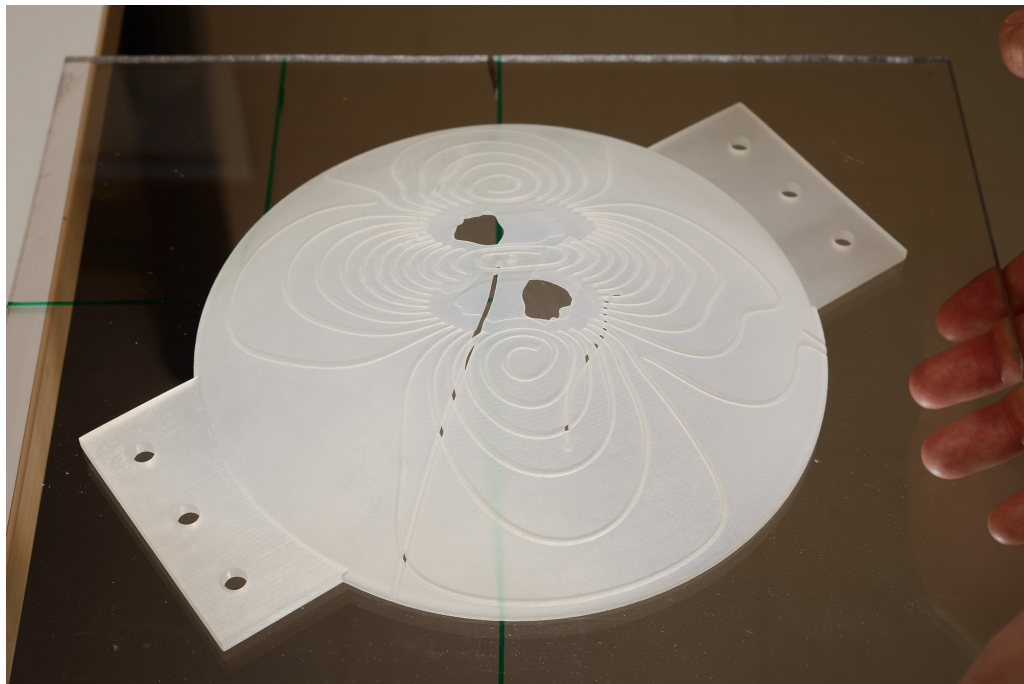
A single layer of the mTMS coil former. The holes in the middle are crafted to ensure that all wiring fits within the layer. The layer has a thickness of 2.9 mm.
